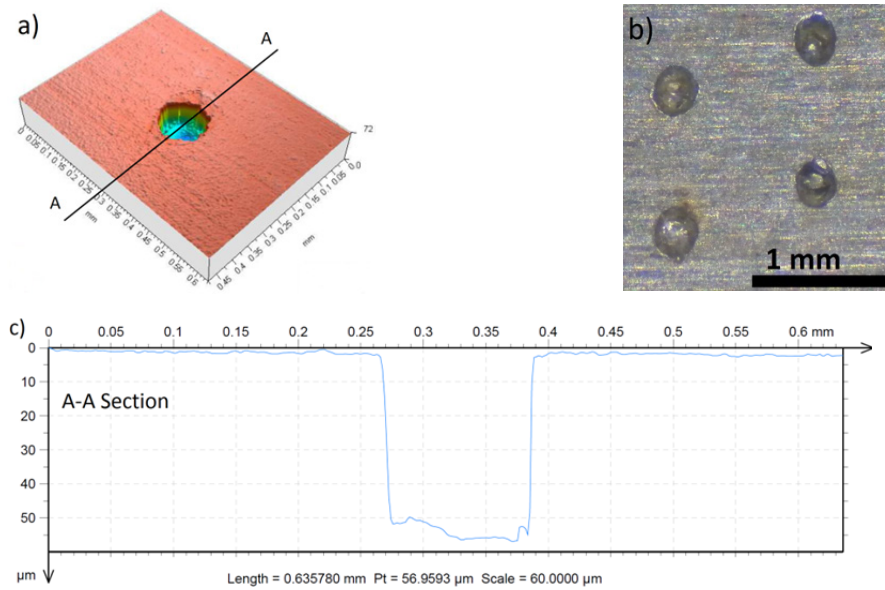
(a) 3D measurement; (b) dimples and (c) extracted profile
